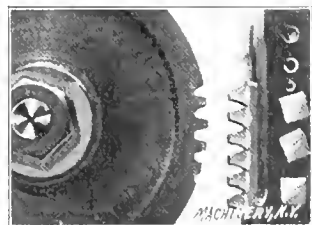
Fourth Position: Blank withdrawn from the Cutter
